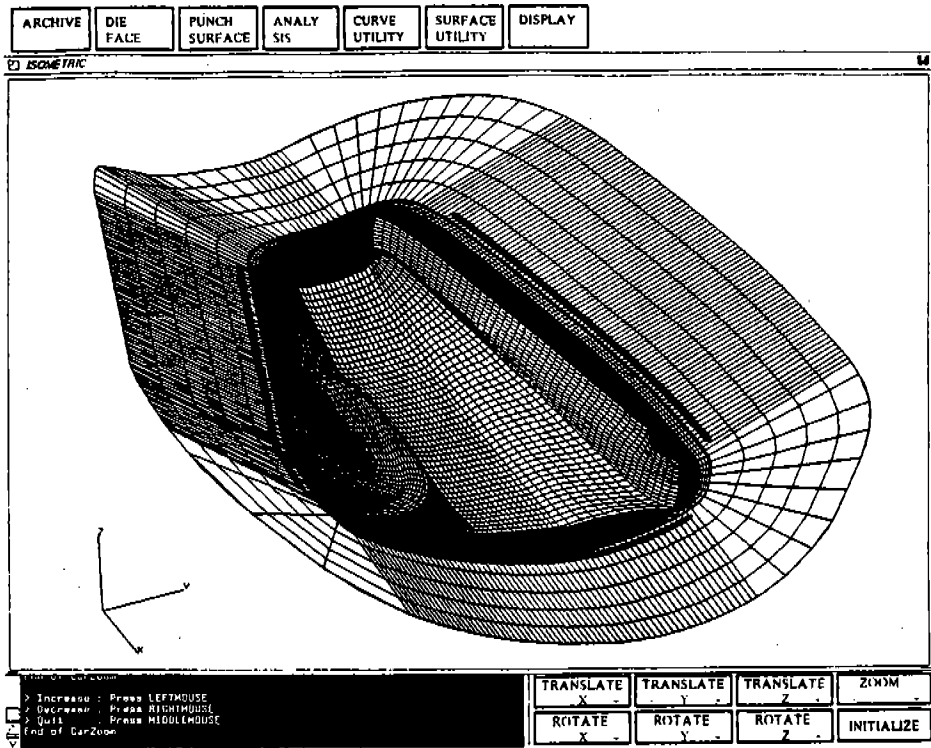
Final shape of die-face, i.e. product, step draw surface, blankholder surface, and draw bead surface
